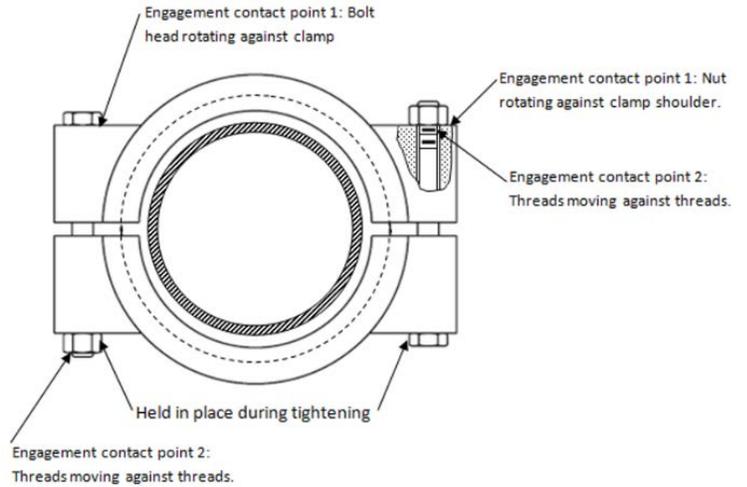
2-Bolt High Pressure Clamp Joint Assembly
